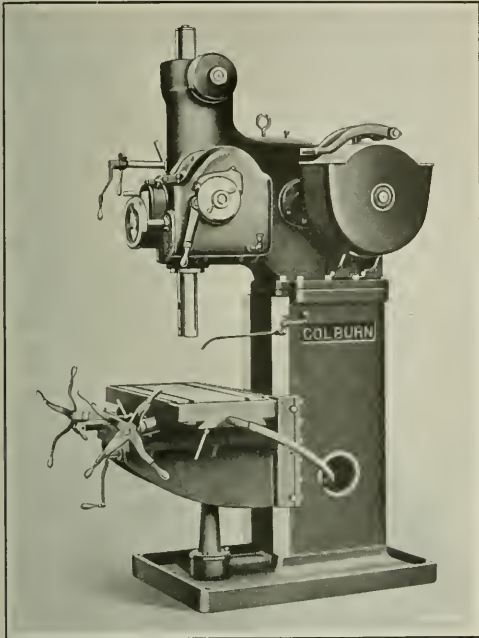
Single-spindle Heavy-duty Drilling Machine made by the Colburn Machine Tool Co.
